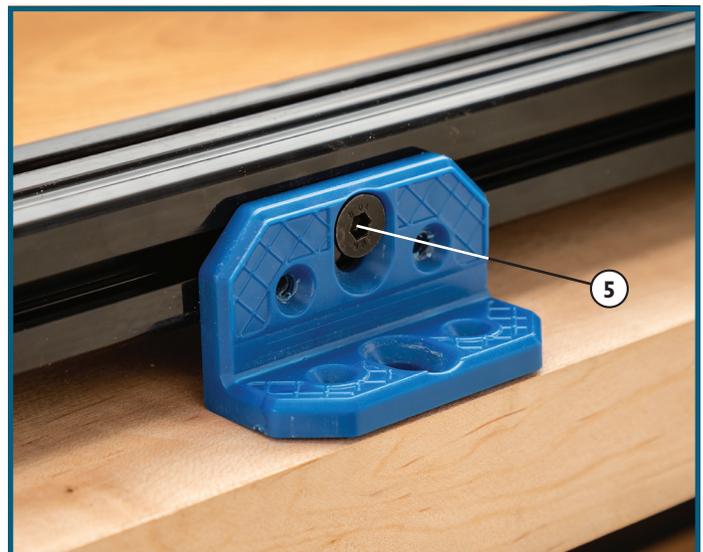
Orientation for 1" to 1 1/4" thick workpieces
